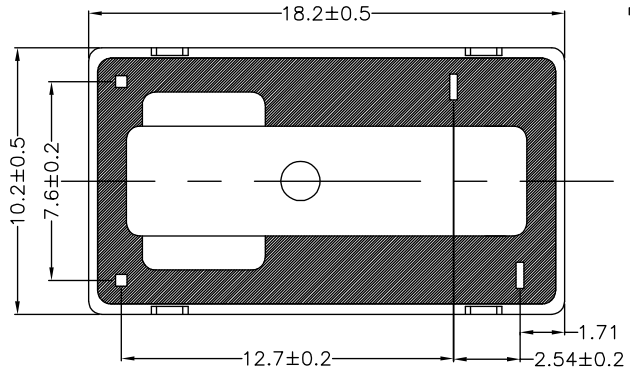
FIGURE FOR PRINTED CIRCUIT BOARD PROCESSING (BOTTOM VIEW)
